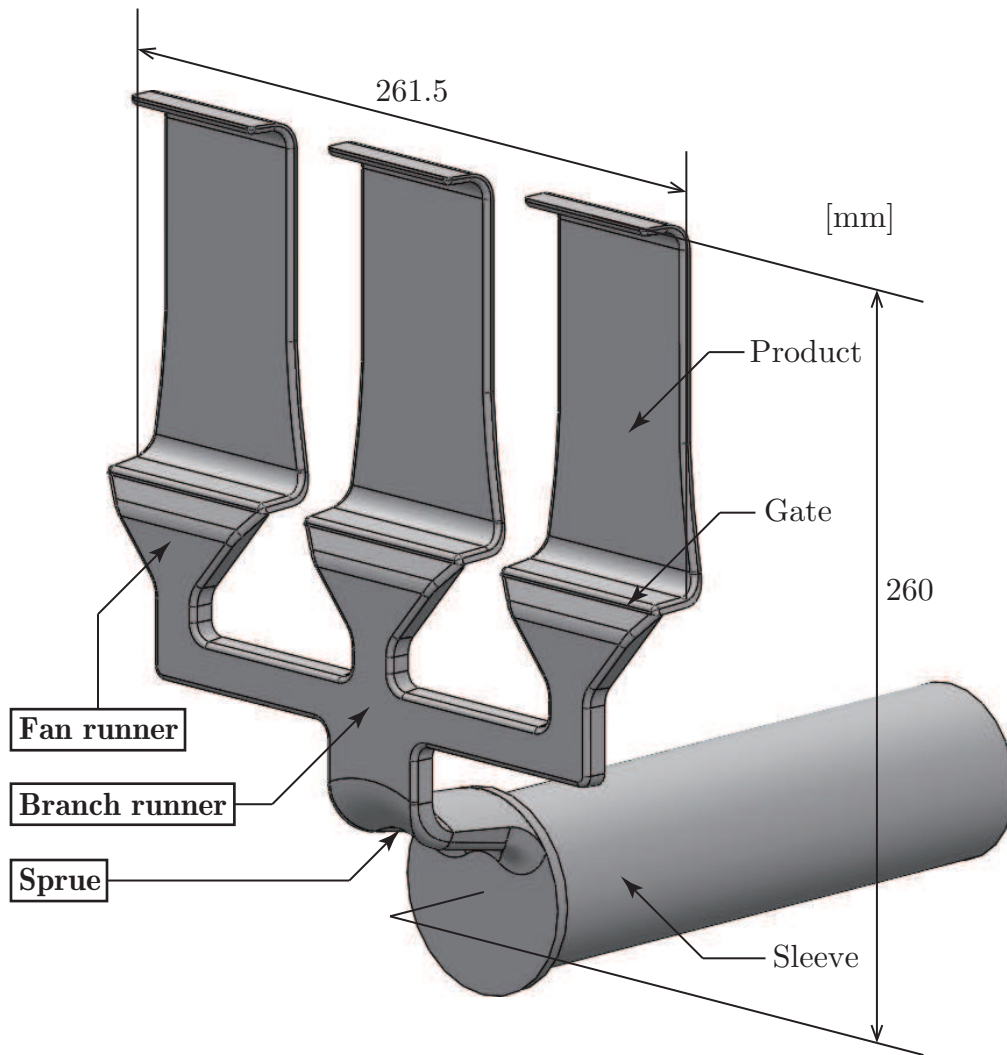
Outline drawing of the target shapes of products and casting design
